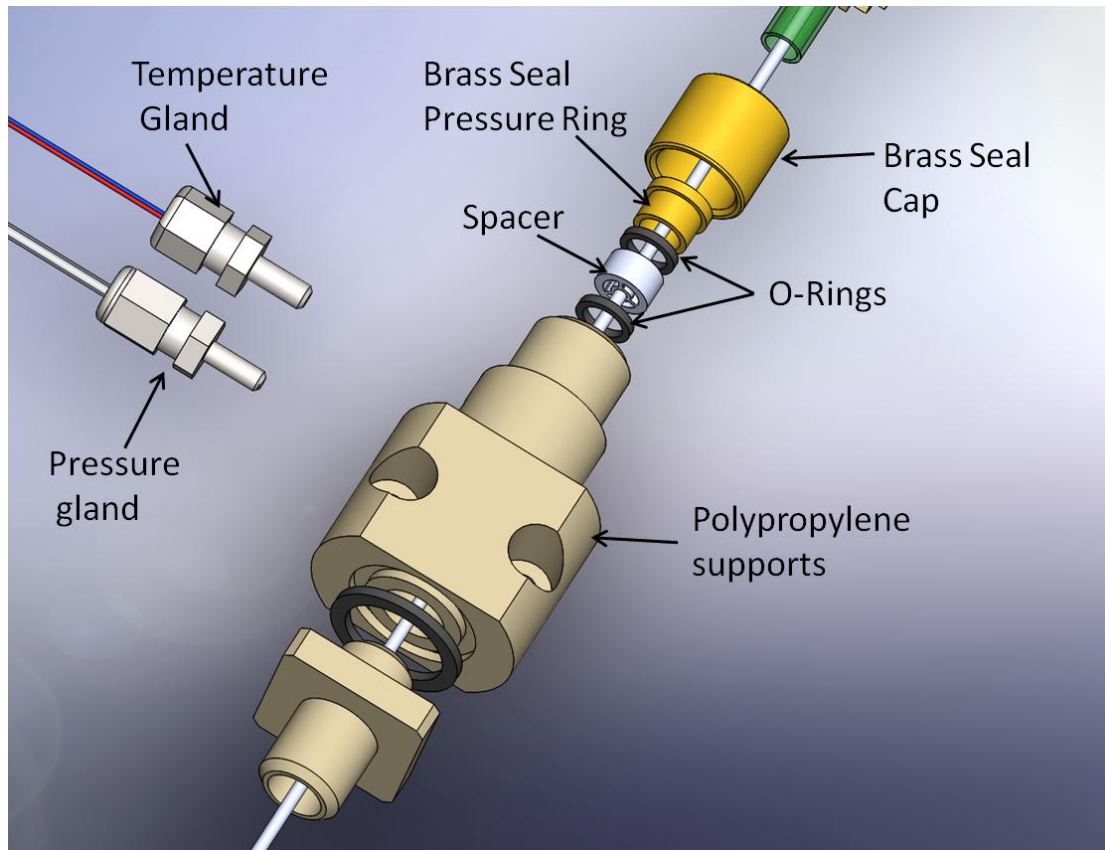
Polypropylene supports, O-rings seal and seal cap
